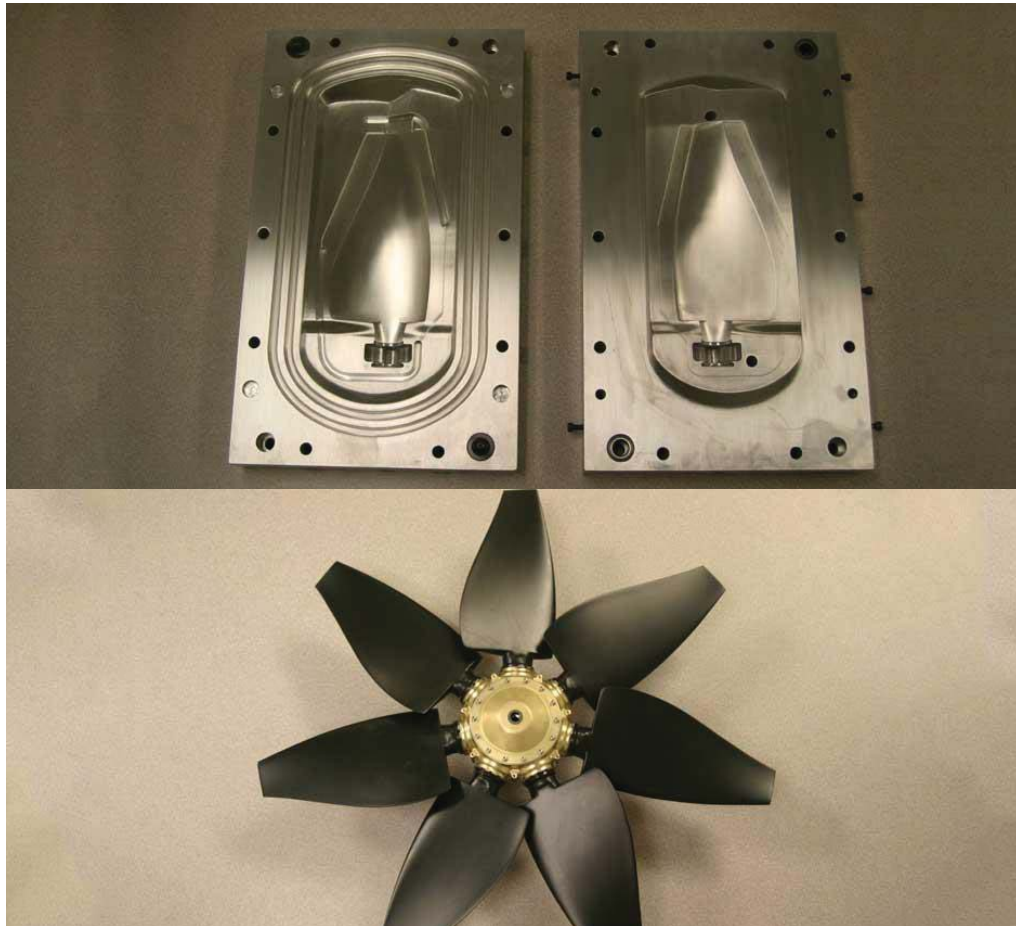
Aluminum tooling mold for producing rotary blades (above) and the resulting assembled part (below) [8].
